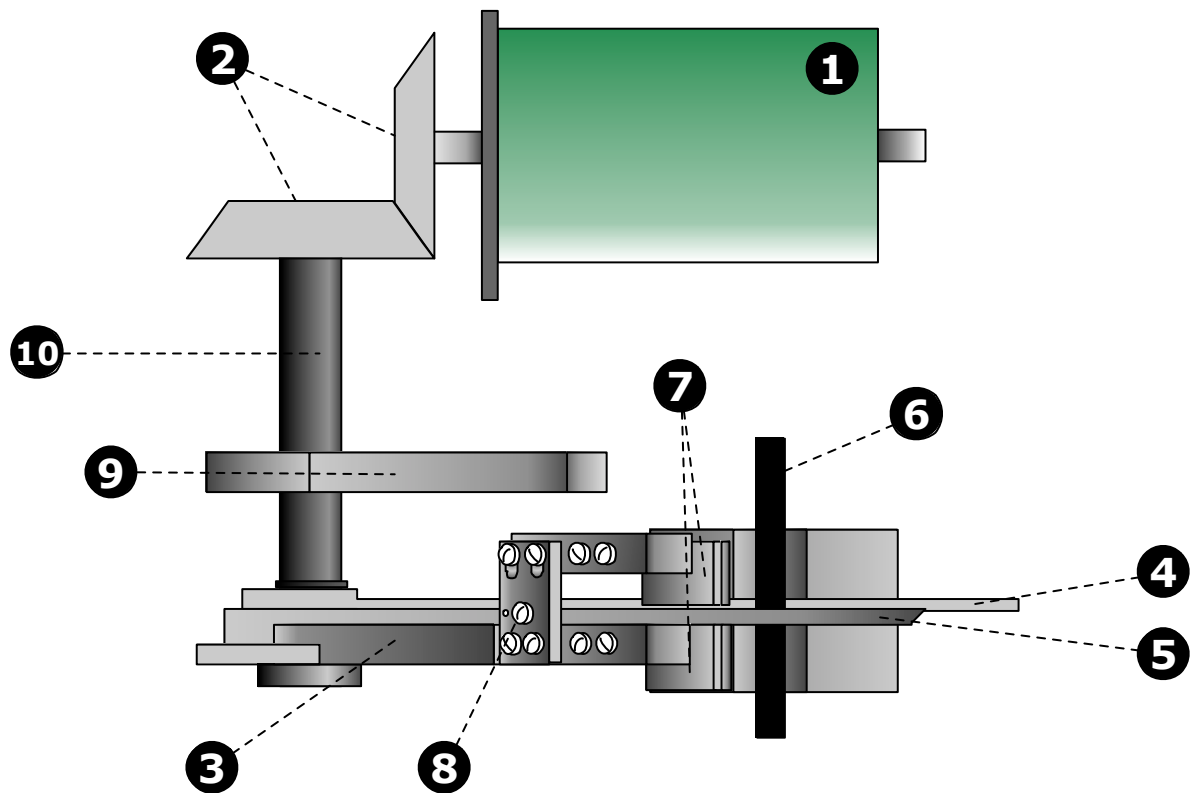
Front view of tow cutting mechanism: ① C axis stepper motor, ② bevel gears, ③ cutting carriage arm, ④ fixed blade, ⑤ moving blade, ⑥ tow, ⑦ top and bottom pressure pads, ⑧ pressure pad position adjustment screw, ⑨ cutting shaft bushing lower mount, ⑩ cutting shaft.
